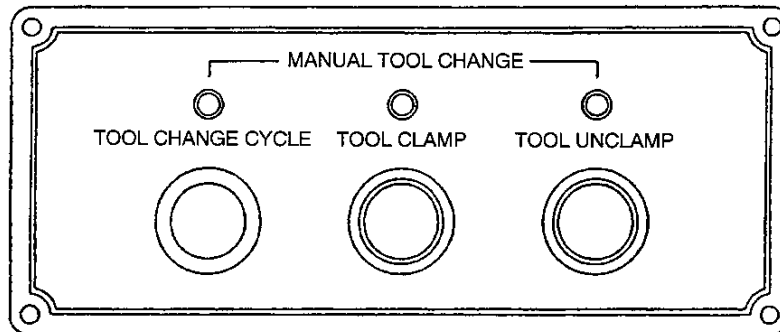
Manual Tool Change Operation Panel (Vertical Machining Centers)
